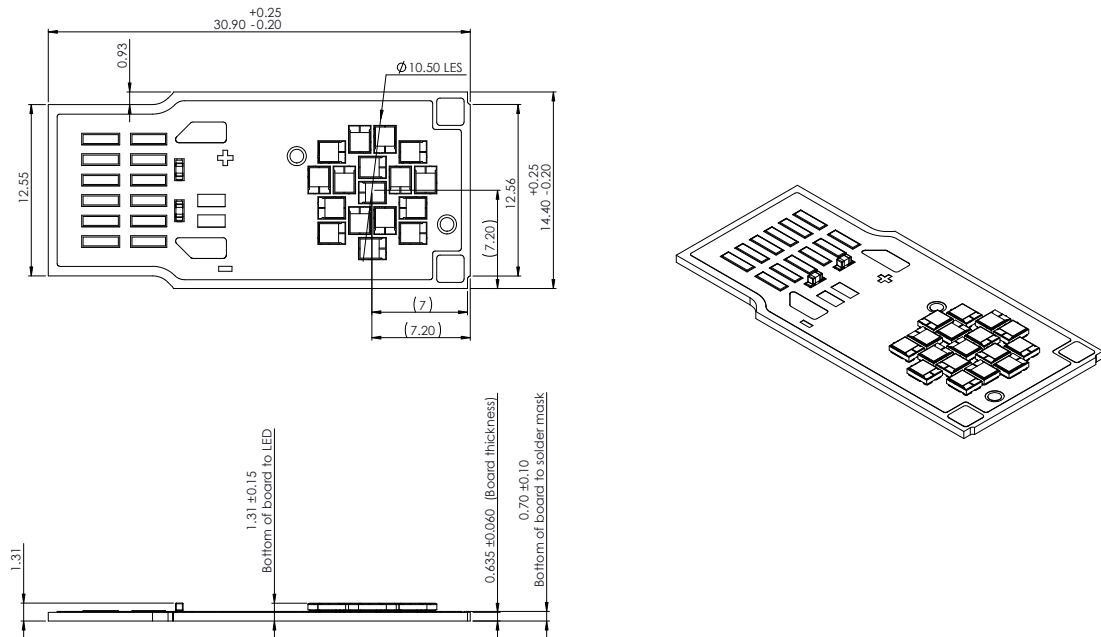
Package outline drawing for LUXEON S2000 / LXSx-Pxxx-0017N (Connector-less).
